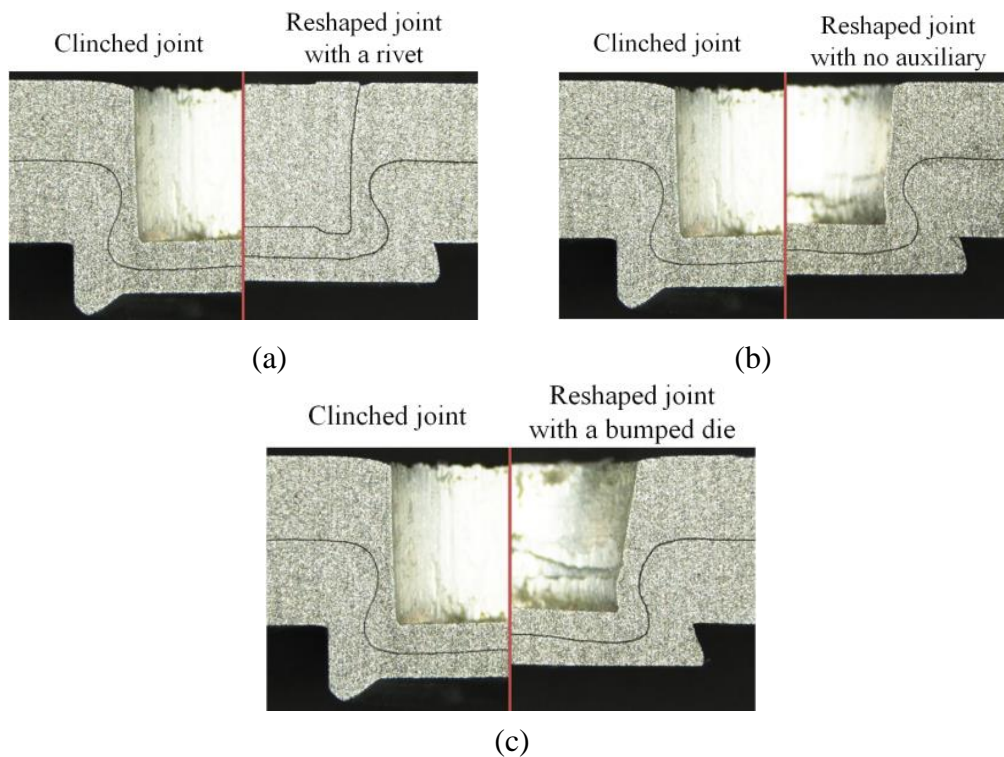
Cross-sectional profiles of the different joints: (a) reshaped joint with a rivet, (b) reshaped joint with no auxiliary, (c) reshaped joint with a bumped die
